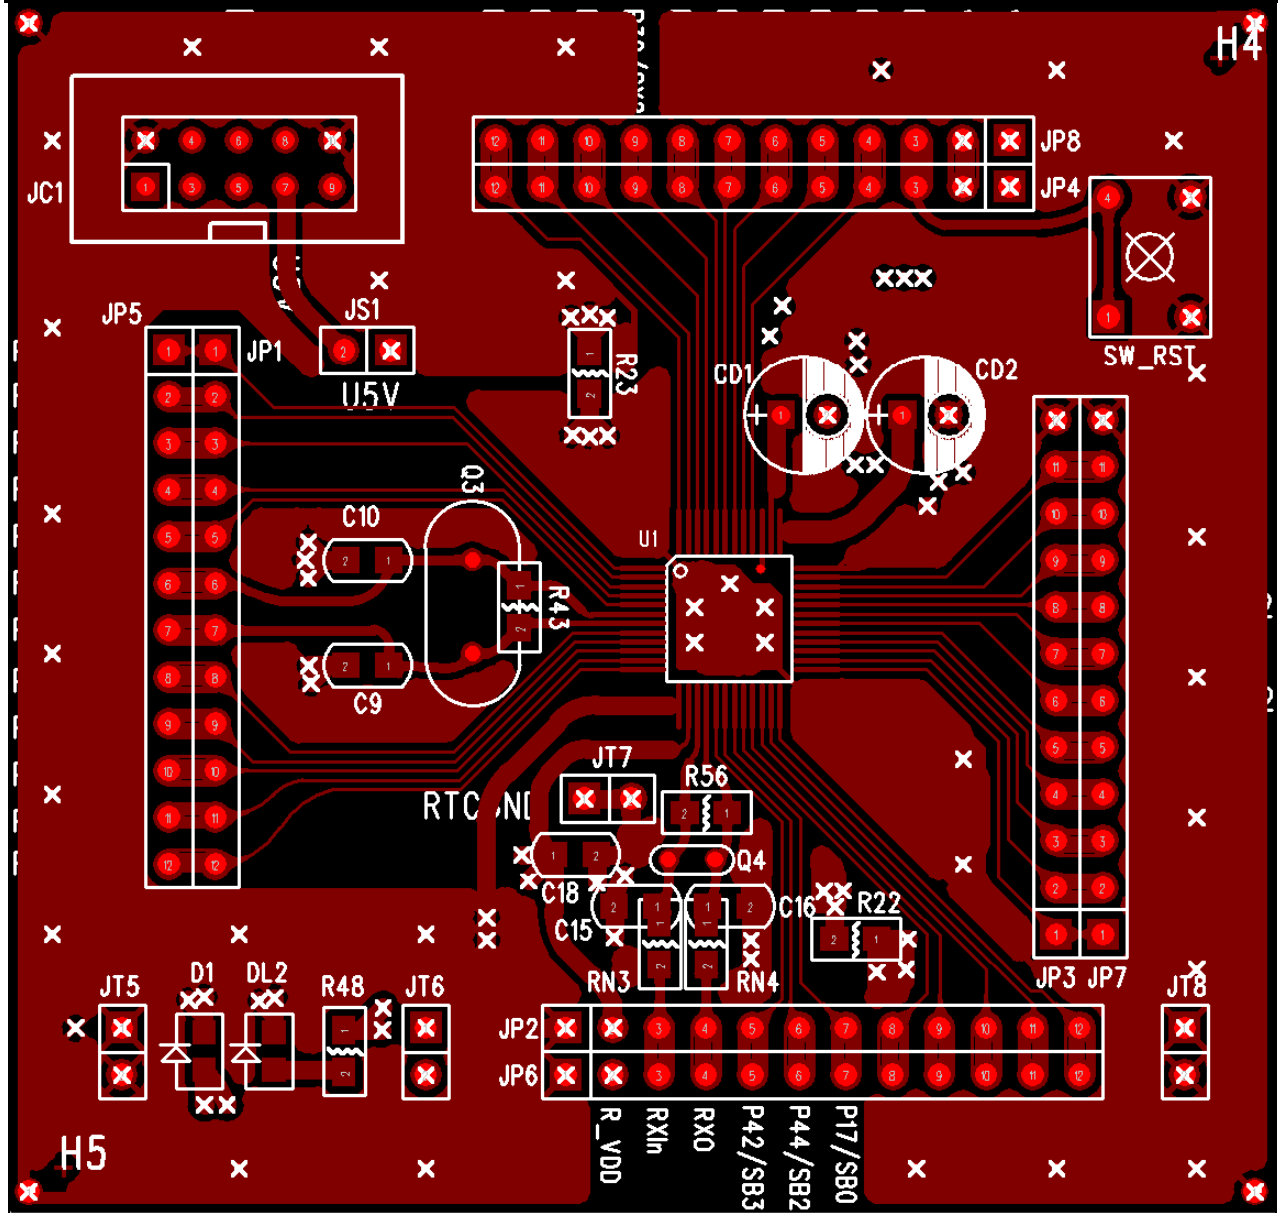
IS31CS8968A Evaluation Board PCB Layout - Top Layer
